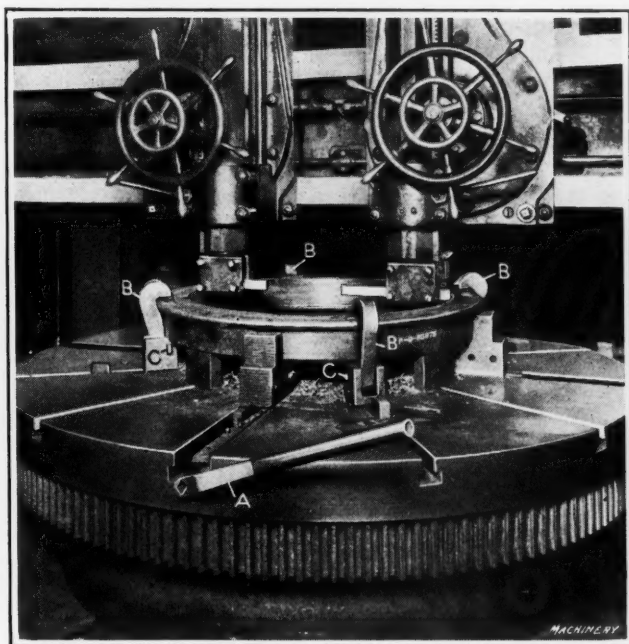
Locomotive Wheel Tire-boring Machine with Universal Chuck having Quick-acting Jaws for centering the Work
